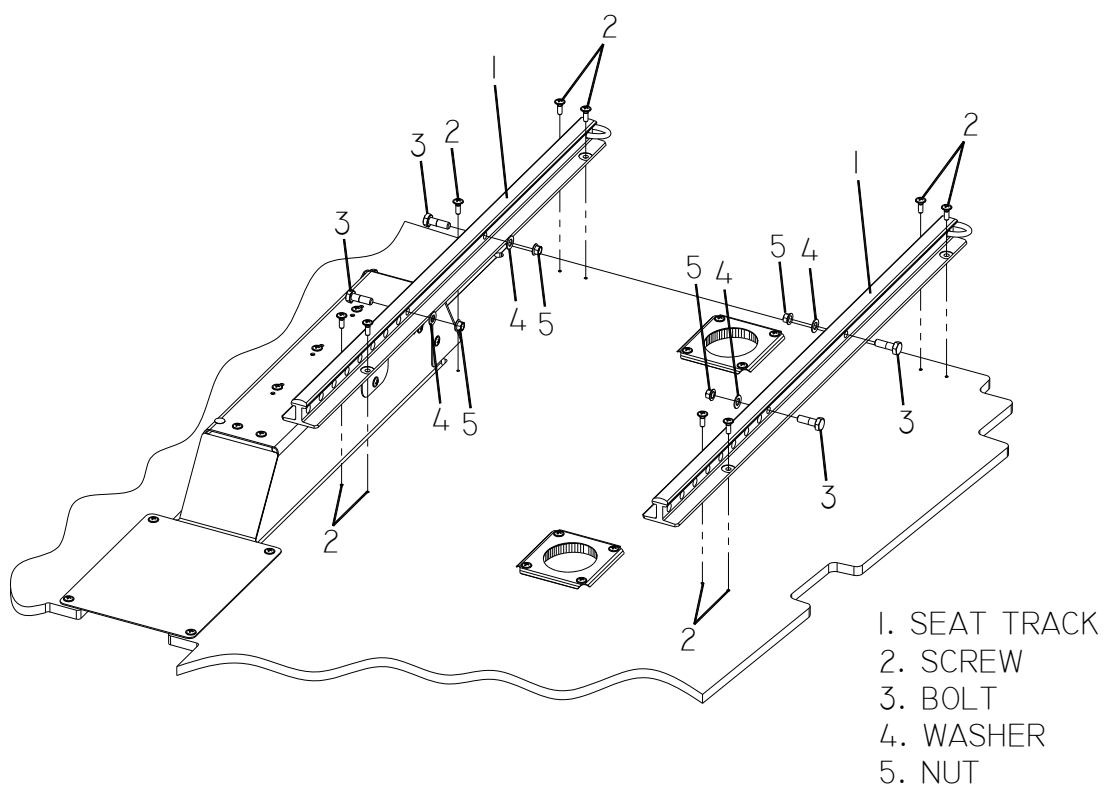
Flight Compartment Floor Removal and Installation.
